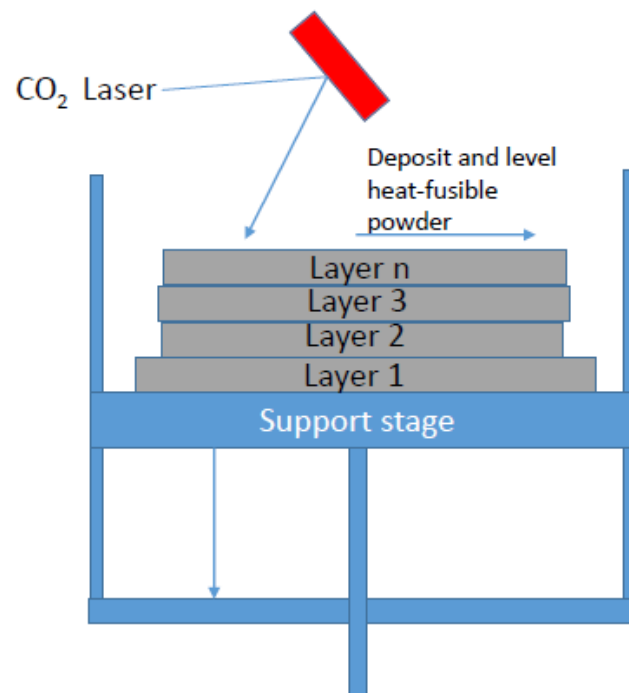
Schematic drawing of the Selective Laser Sintering (SLS) process.
